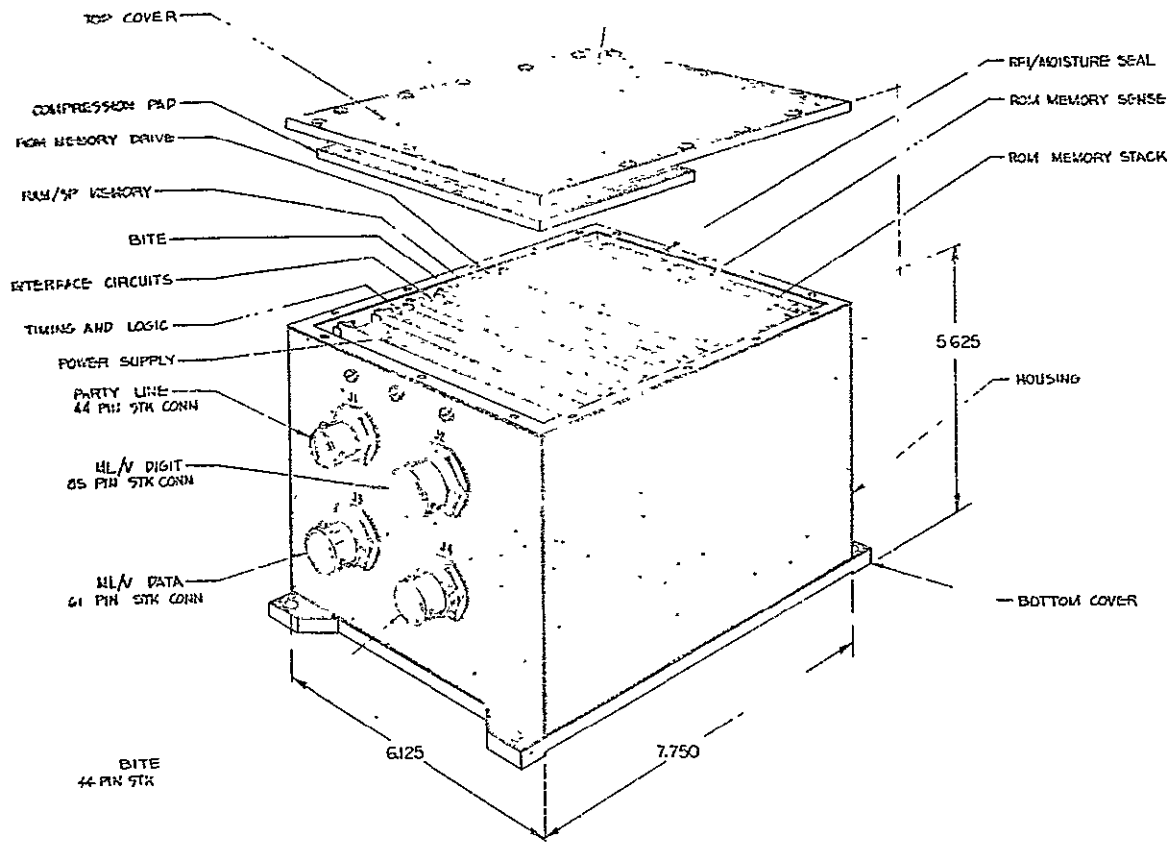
MASTER UNIT, PACKAGE DESIGN
